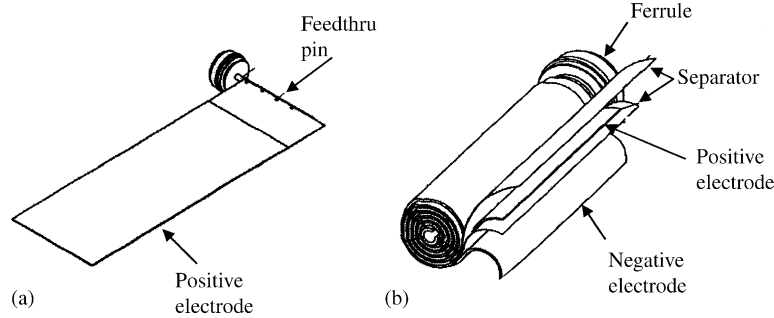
(a) Schematic view showing the inner end of the positive electrode substrate welded to the feedthru pin and (b) the layers of a spirally wound electrode assembly.
